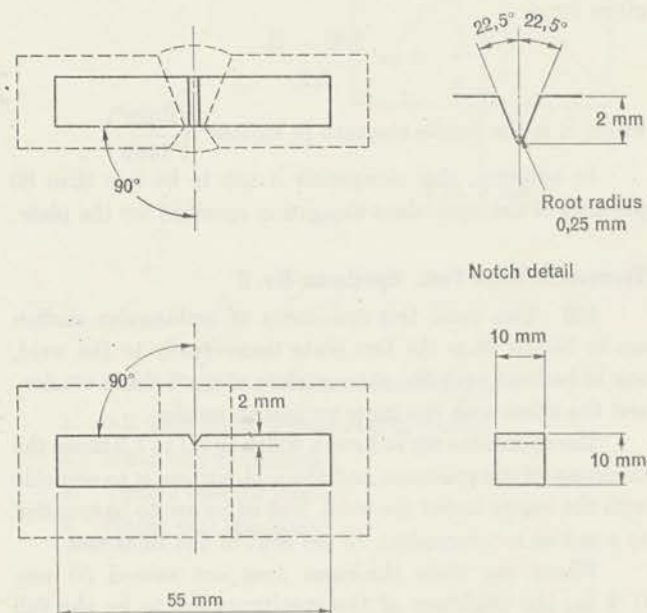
SPECIMEN NO. 5 CHARPY V-NOTCH IMPACT TEST SPECIMEN
